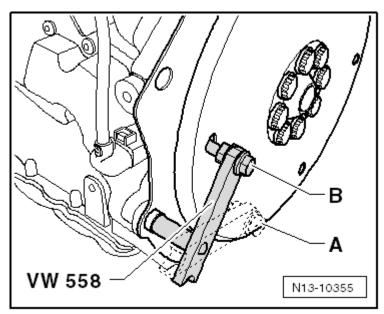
Identifying Flywheel Lock Adapter -VW 558- And Bolt Courtesy of AUDI OF AMERICA, LLC
